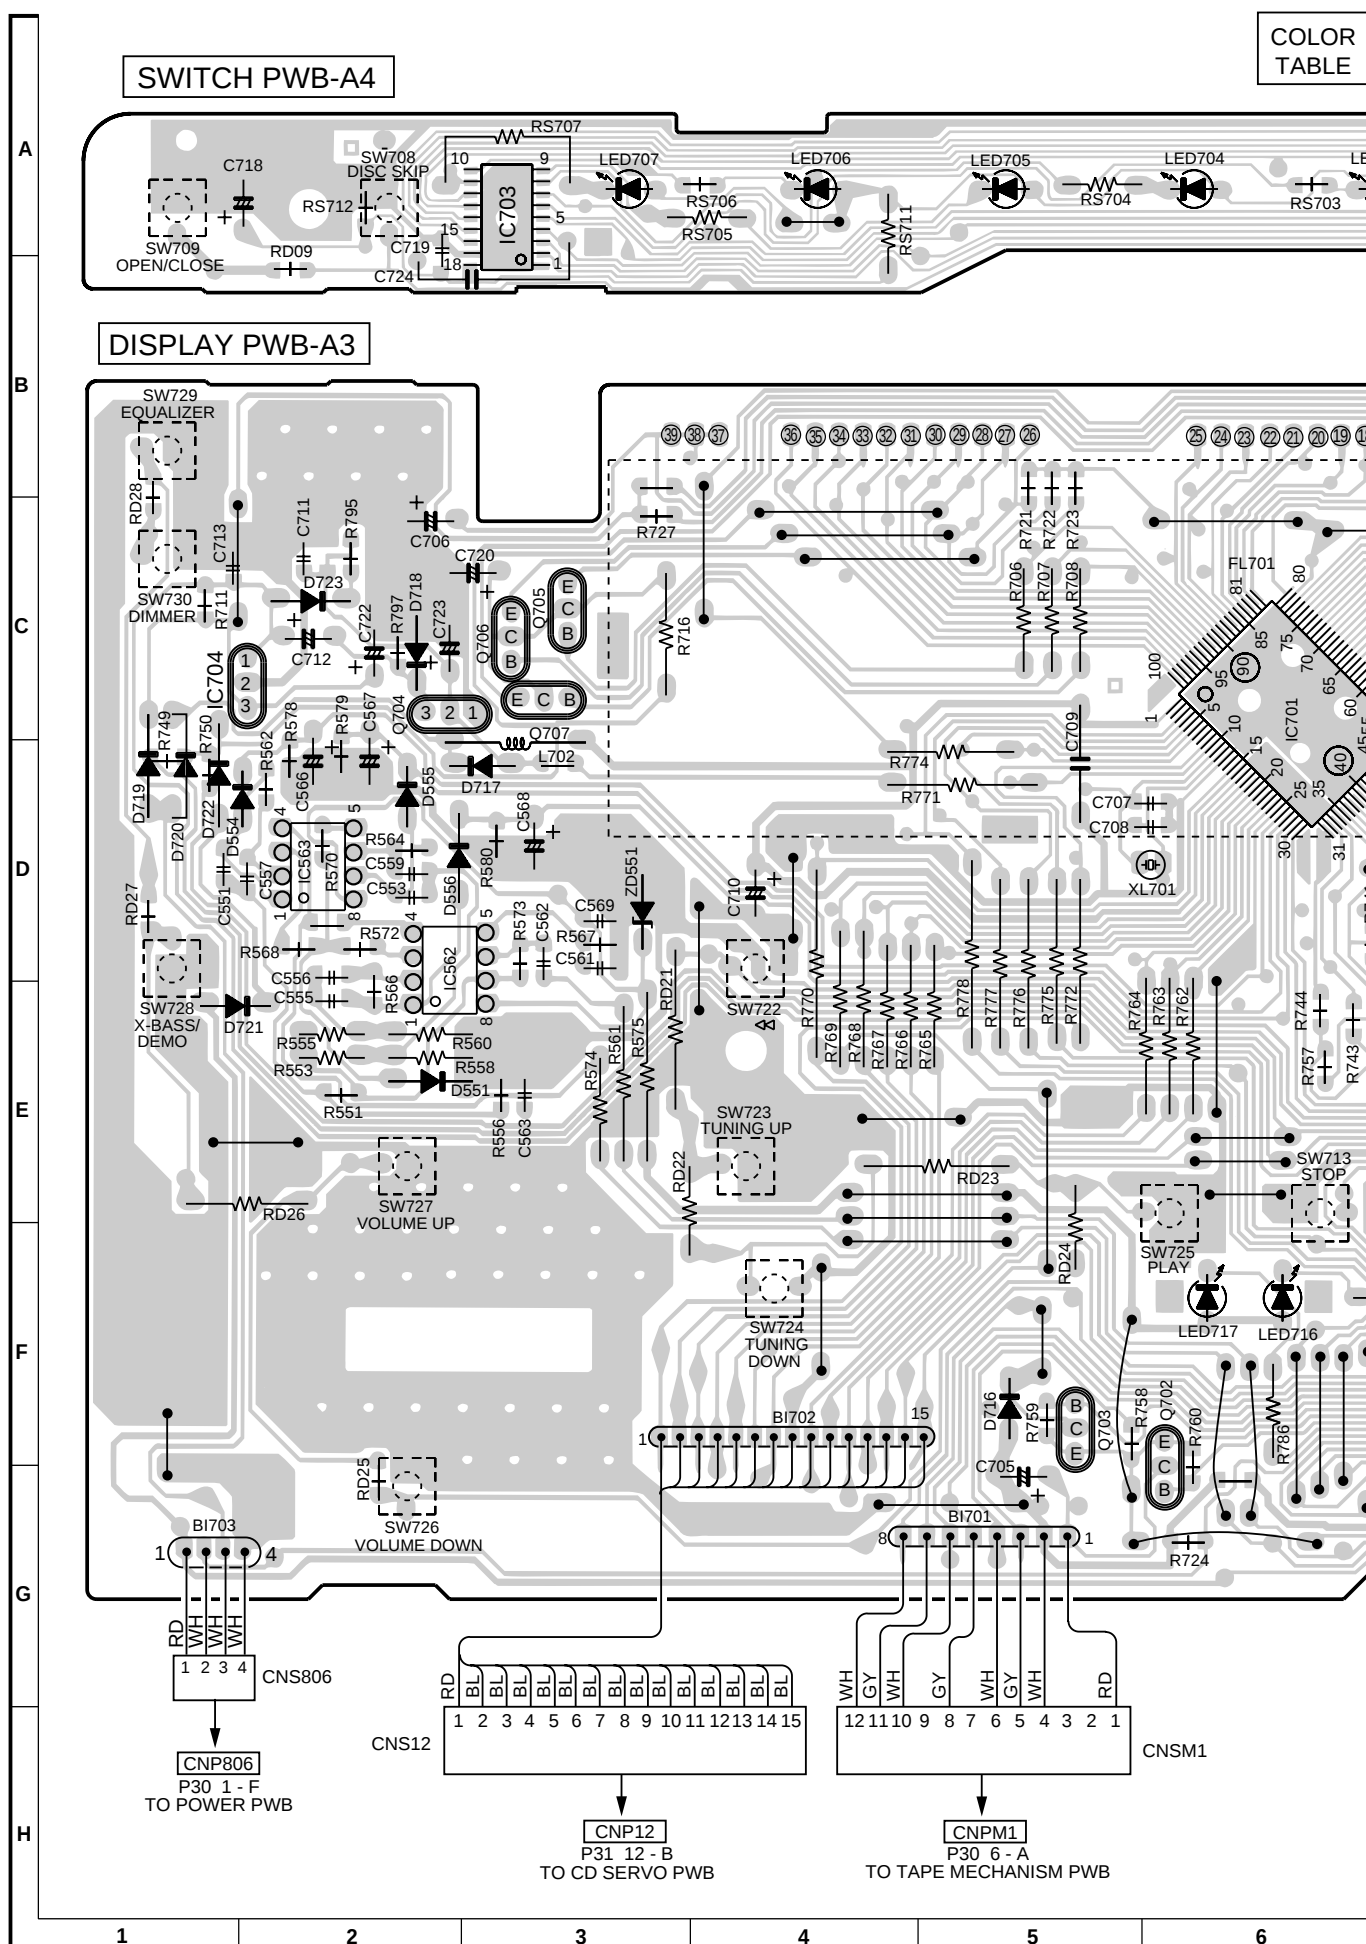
WIRING SIDE OF P.W.BOARD (4/7)
